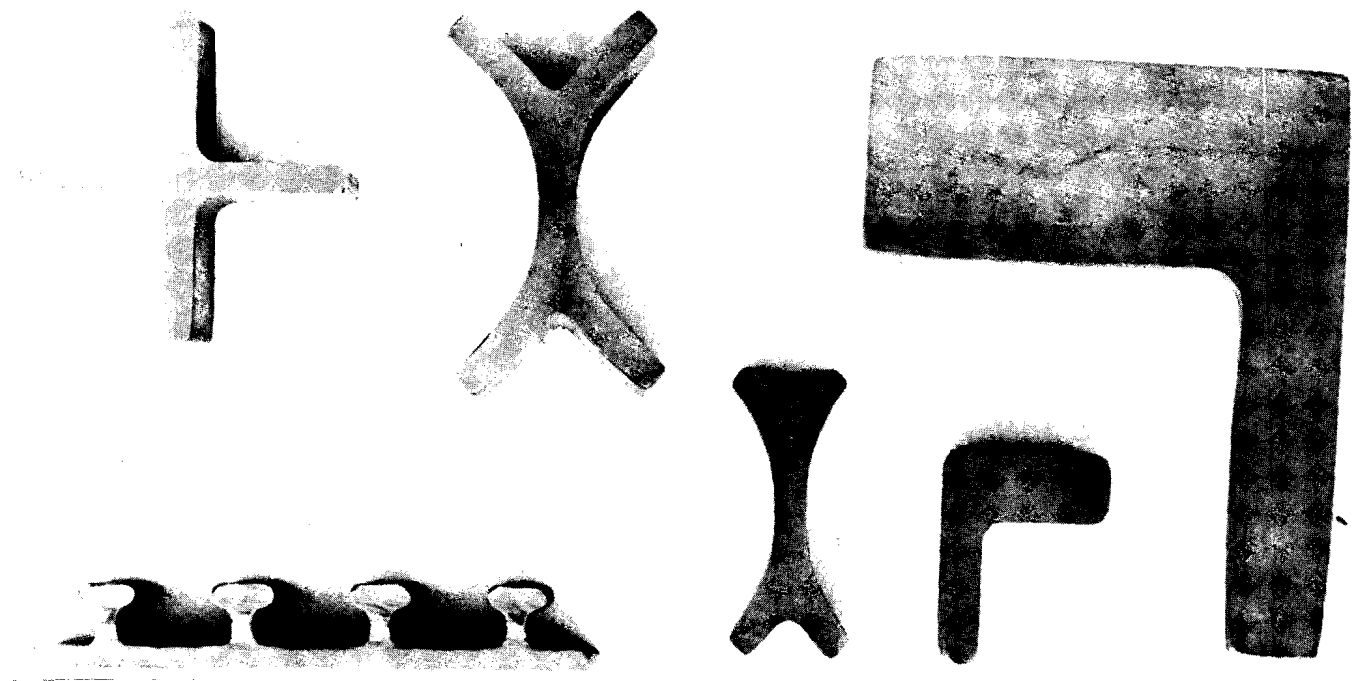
TYPICAL LARGE TITANIUM EXTRUSIONS BY CAMERON IRON WORKS
